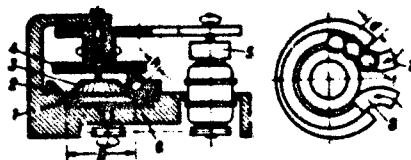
Diagram of general-purpose semiautomatic machine tool with continuous circular displacement of workpiece: 1) Abrasive wheel; 2 and 3) tapers forming annular slit and positioning workpiece; 4) feed disc rolling workpiece along slit; 5) reduction gear transmitting motion of motor to feed disc; 6) workpiece; 7) loading trough; 8) discharge trough.
